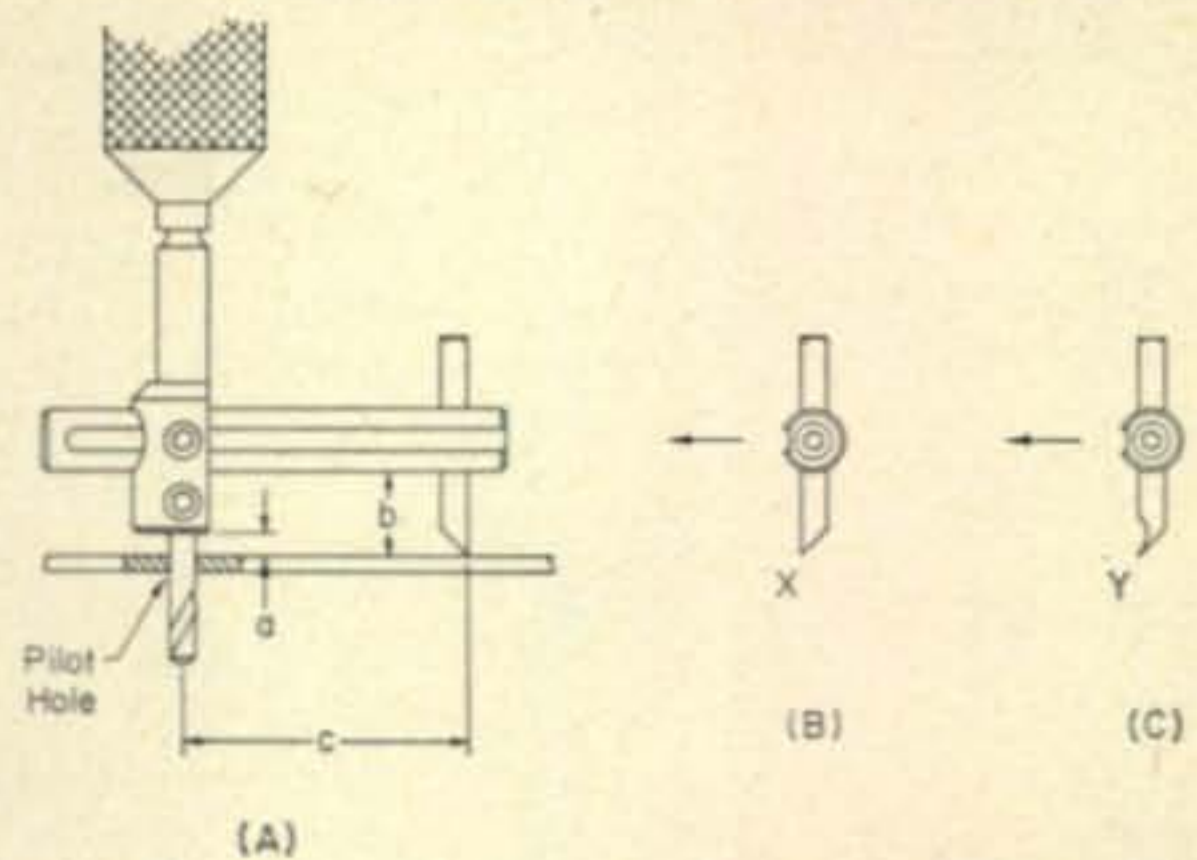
(A) Setting up the fly cutter. Dimension b should be adjusted so that a is slightly greater than the thickness of the metal to insure the pilot drill's bearing on the smooth part of the pilot drill shank. Less strain will be placed on the cutting blade also. Dimension a should be adjusted according to the radius of the desired hole.
